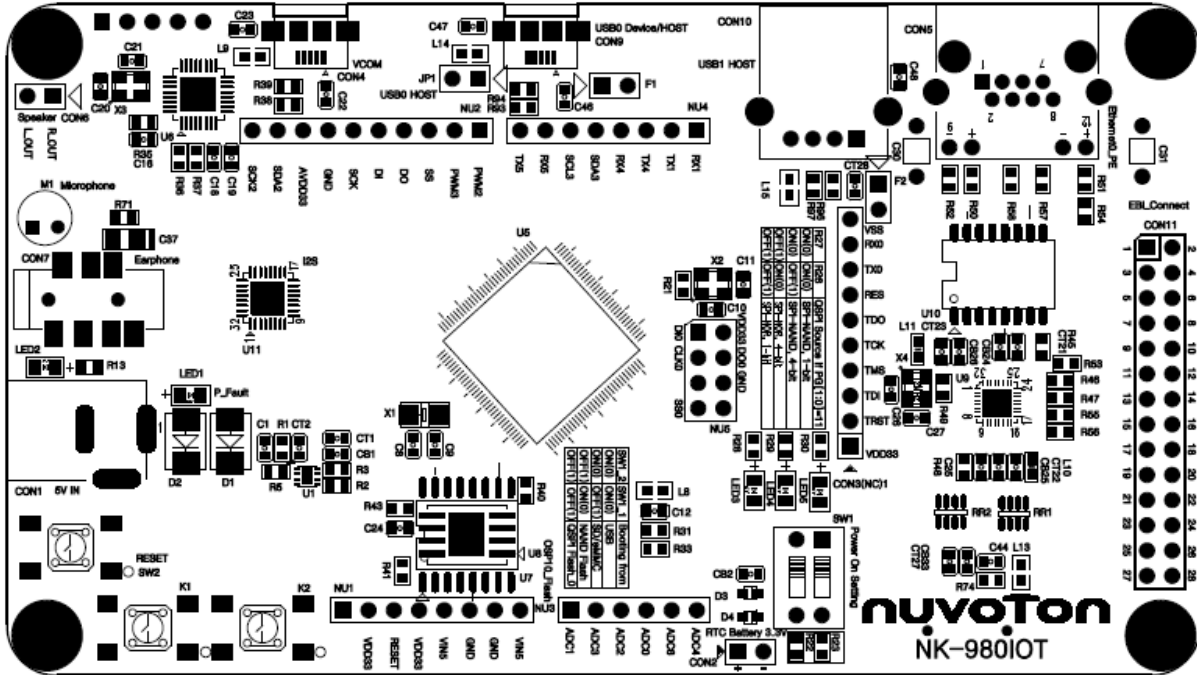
NuMaker NUC980 IIoT Board Front PCB Placement
